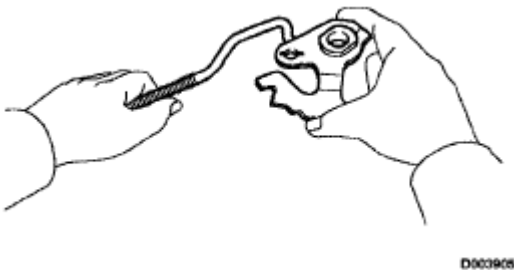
Installing Parking Lock Rod To Manual Valve Lever
